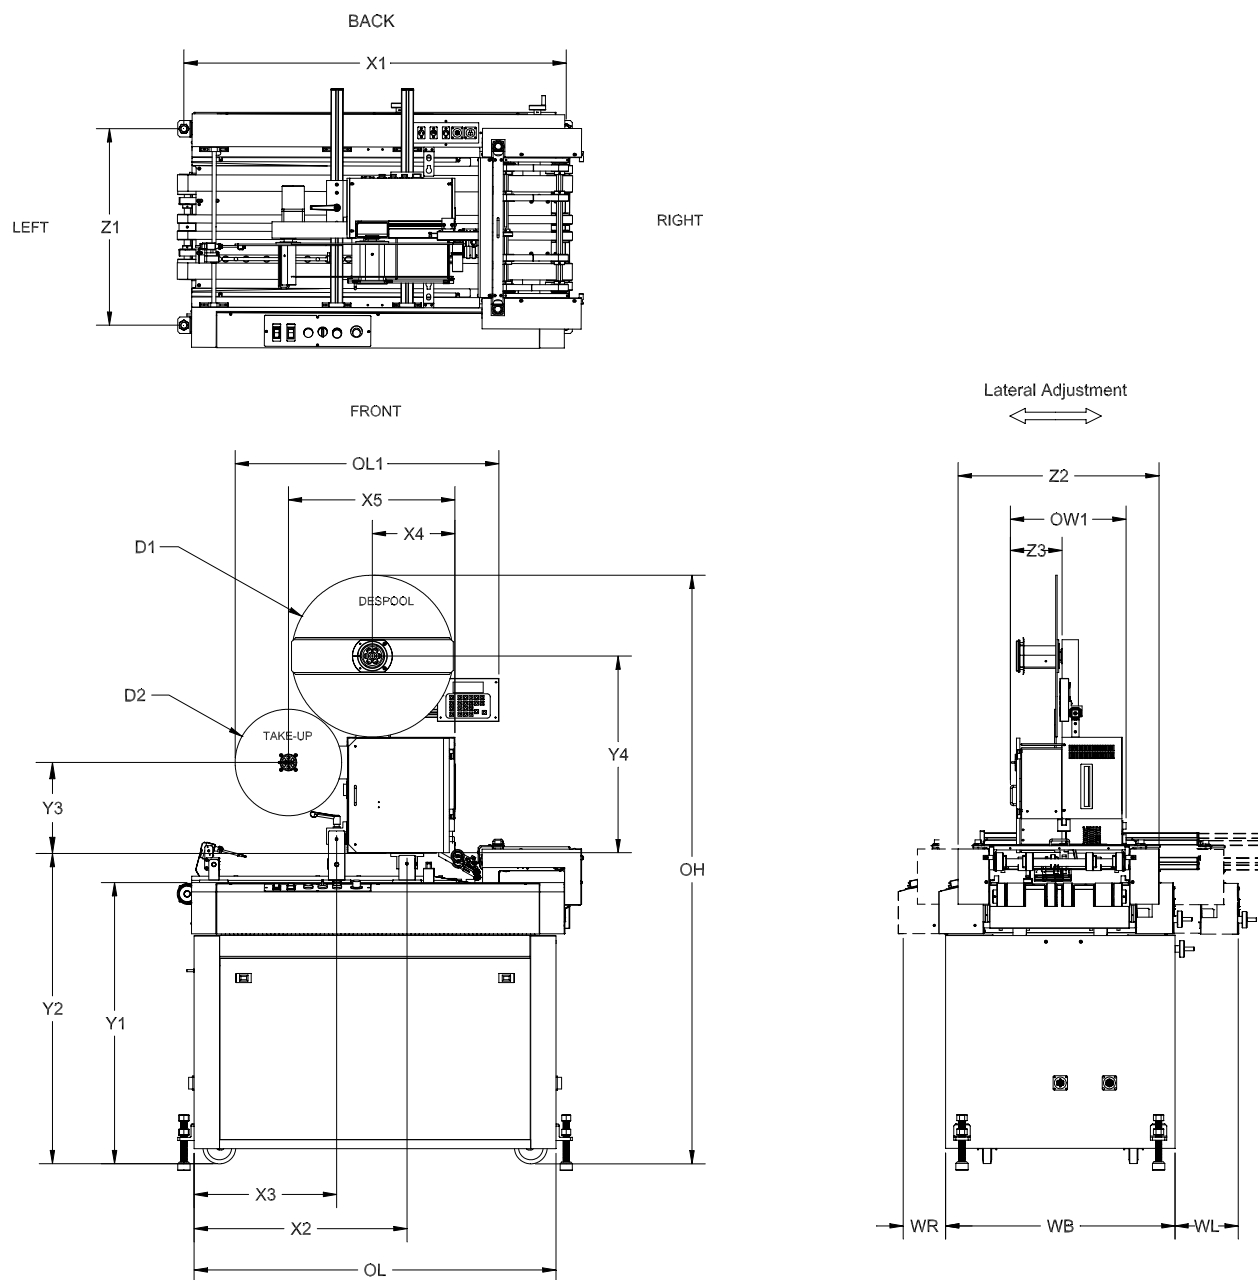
Tabber/Labeler Base and Head dimensions.
